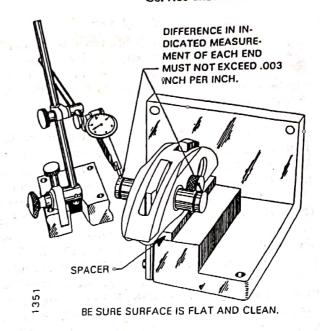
Checking Parallel and Squareness of Counterweight Bushings with Gage Fixture ST-91 — Horizontal Position
